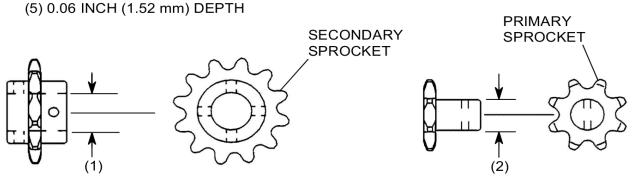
Sheet 9: Aileron Trim Tab Actuator Disassembly/Assembly
